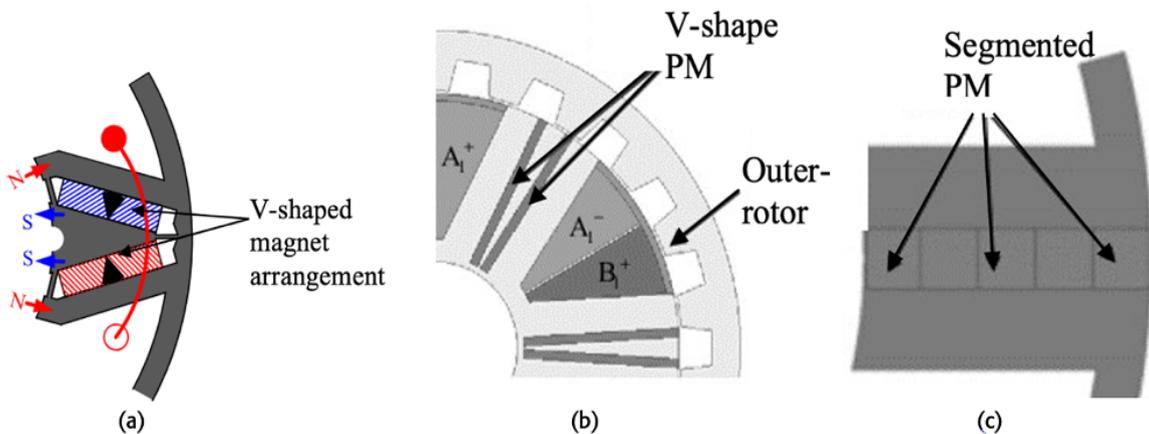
Magnet-V-shaped (a) rotor inner, (b) rotor-outer, (c) magnet-segmented
